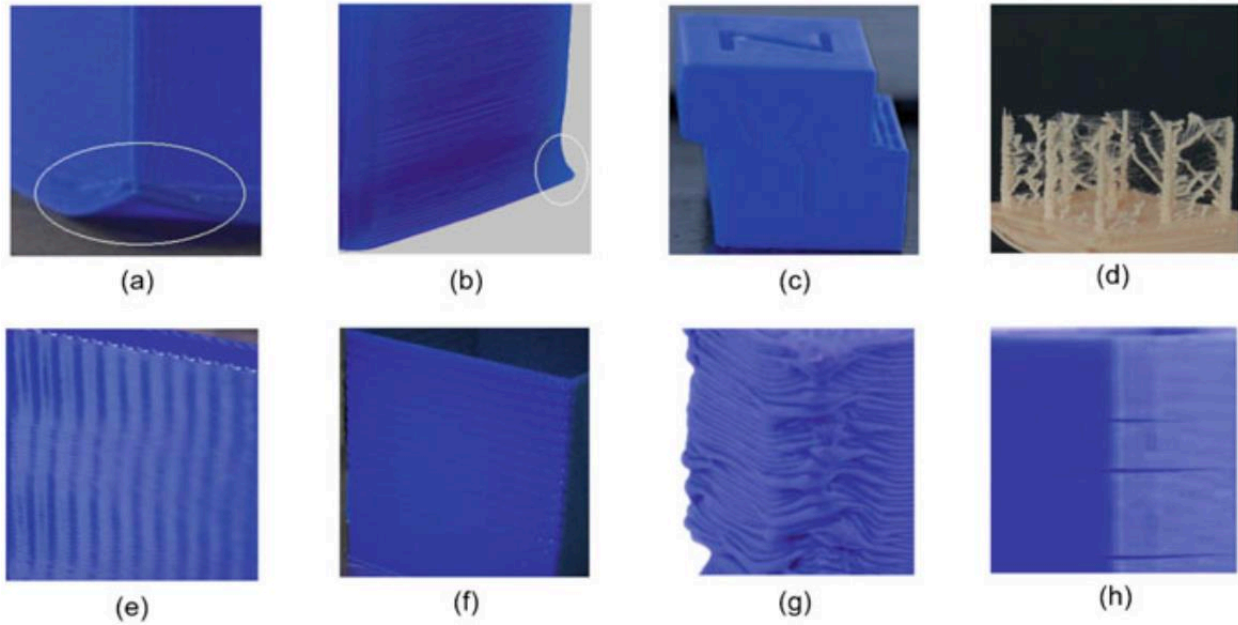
Defects in FDM printed parts, a warping, b elephant's foot, c layer shifting, d stringing, e ringing, f z-wobble, g curling, and h layer separation [15]
